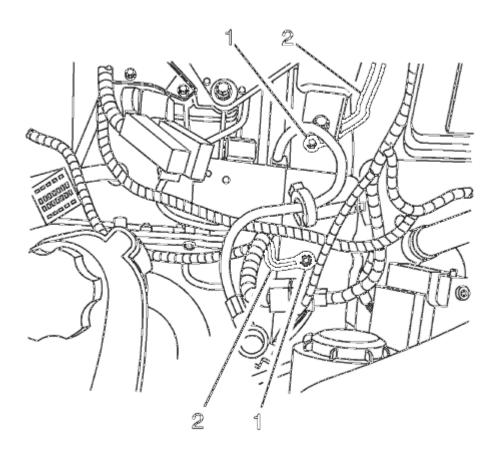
Electrical Vacuum Pump Courtesy of GENERAL MOTORS COMPANY
